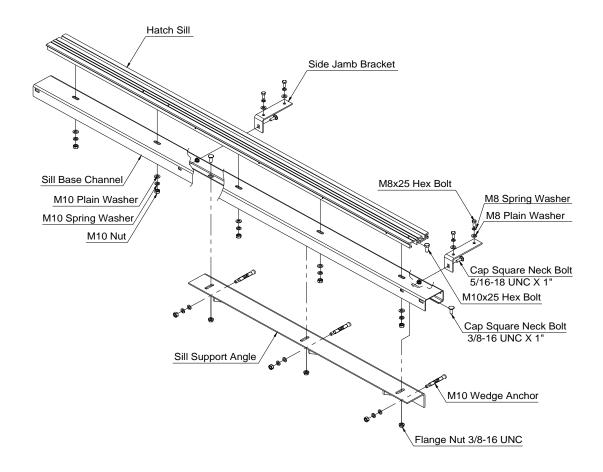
LANDING SILL ASSEMBLY (SS)
